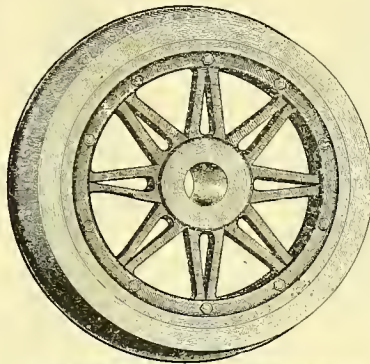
Cast-iron Spoke-center. Tire is Fastened with One Retaining-ring.
